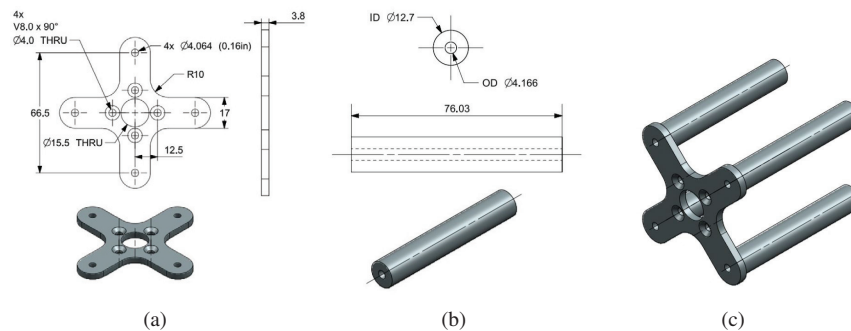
Custom motor mount (all dimensions in millimeters): (a) motor mount, (b) standoff, and (c) completed assembly.
